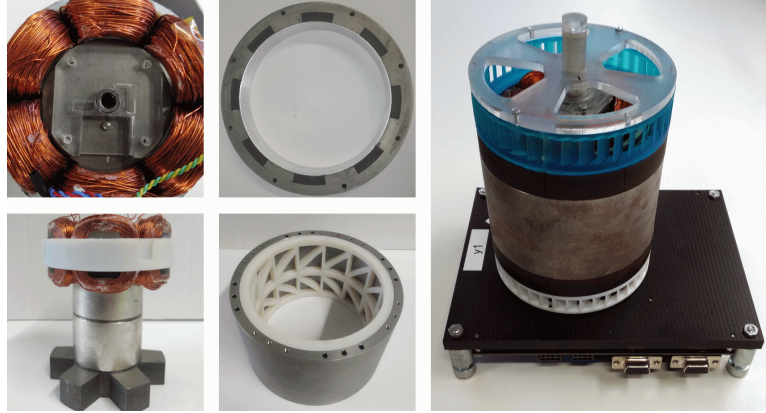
The top stator windings (top left), the stator with the top windings (bottom left), the laminated rotor teeth with the pressed-in aluminum ring (top center), the rotor center piece (bottom center), and the final motor setup (right).
